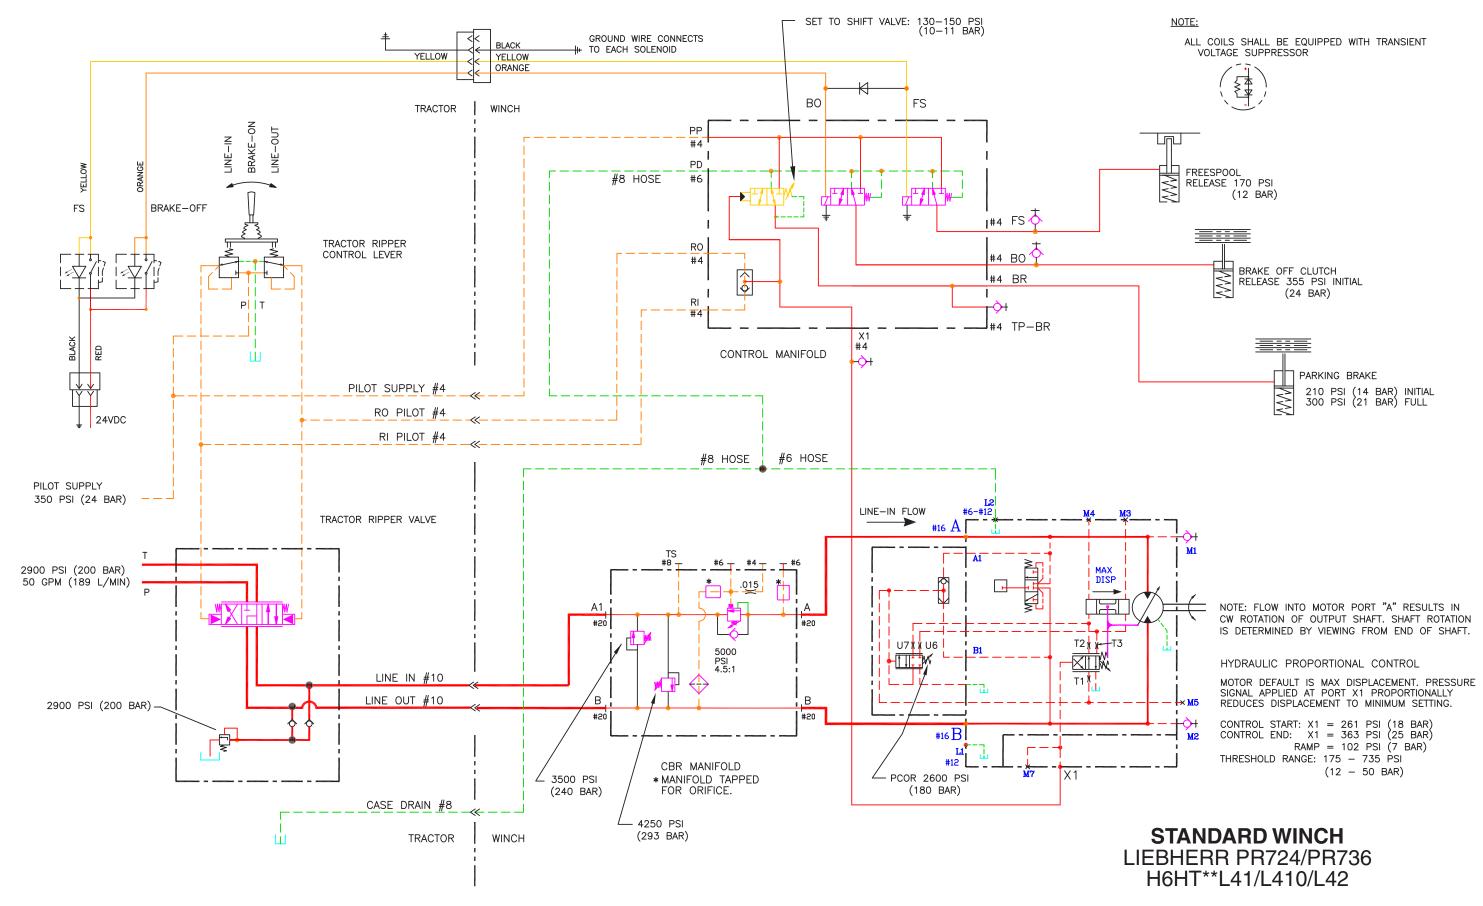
Hydraulic/Electrical Schematic (Rev. P), H6HT (Standard) Winch
